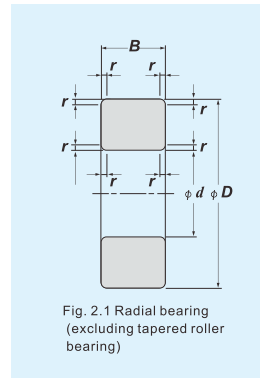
Radial bearing (excluding tapered roller bearing)
